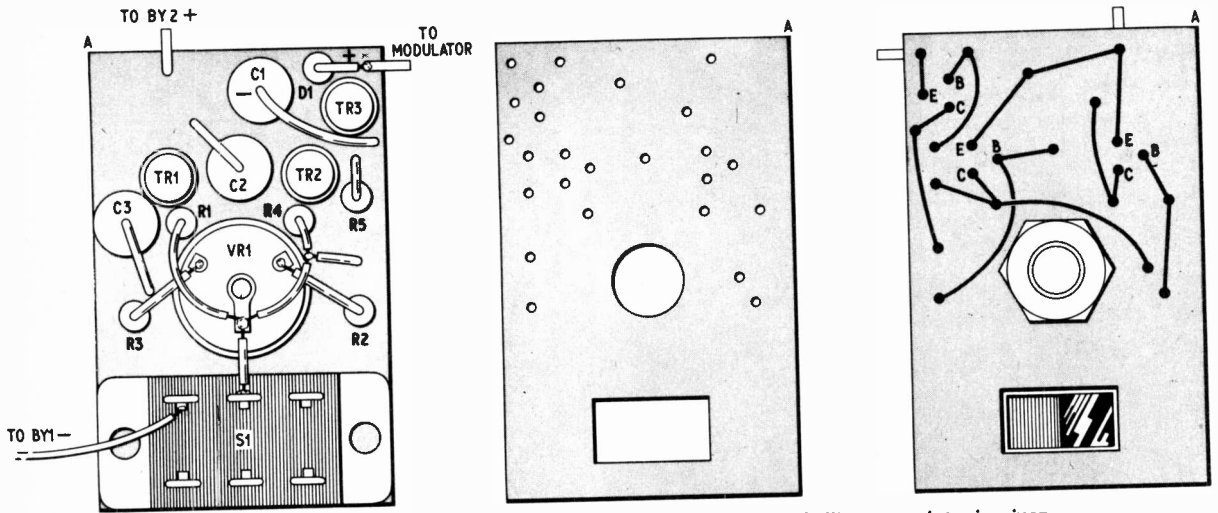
Component layout of the pulser circuit. A full size drilling template is given
